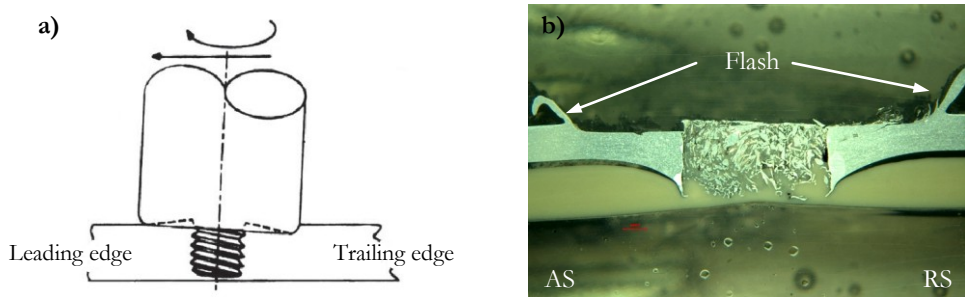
a) Schematic showing the tool interaction to the work-piece at the leading edge and trailing edge [48] b) The cross sections of joint welded with a high degree of tilt angle (2°) showing a large mass of flash at the retreating side (1800 rpm, 10 cm/min, CW).
